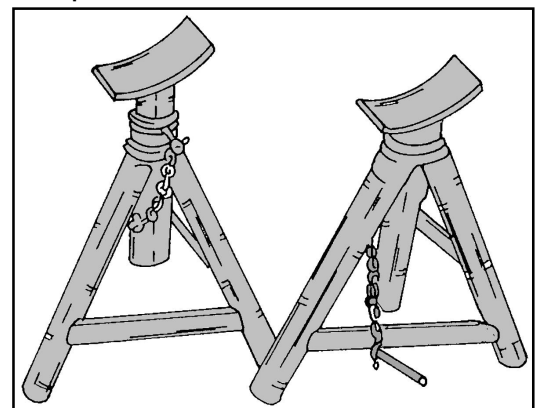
Three-legged chassis stands are the safest method to support the vehicle when work has to be carried out on the underside of
